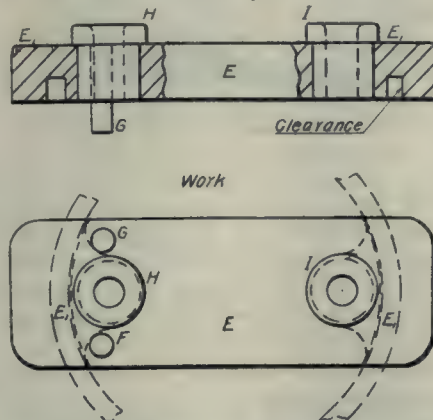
PART SECTIONAL ELEVATION AND PLAN OF DRILL JIG FOR SECOND OPERATION.
